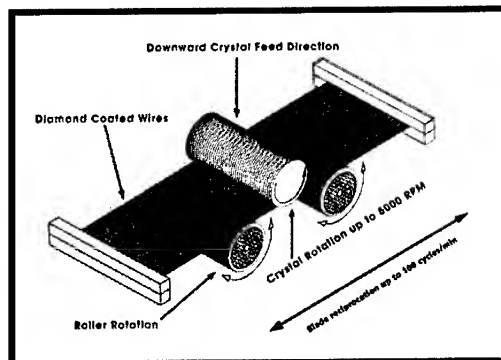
Schematic of a FAST slicer showing high-speed rotation of the workpiece.
